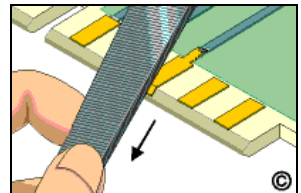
File the overhanging piece of the new edge contact to blend with existing bevel.
